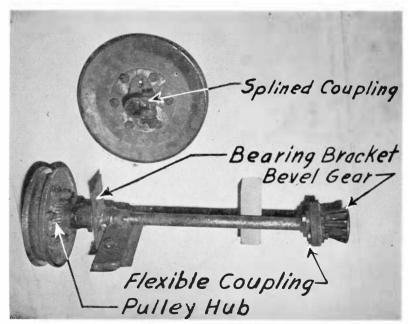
Illustrating flexible coupling, roller bearing and pulleys. Small pulley is 7 inches in diameter and keyed to shaft. Large pulley is 10 inches in diameter and is fastened on a splined sleeve for power take-off.
